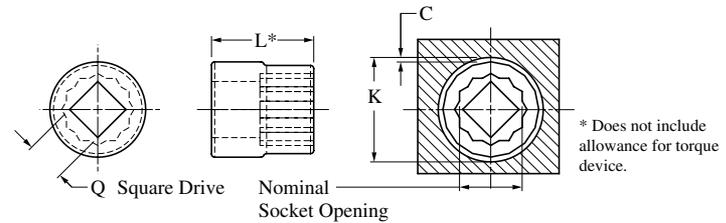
Clearance Dimensions for Single and Double Hexagon Socket Wrenches (See Tables 3a and 3b)
